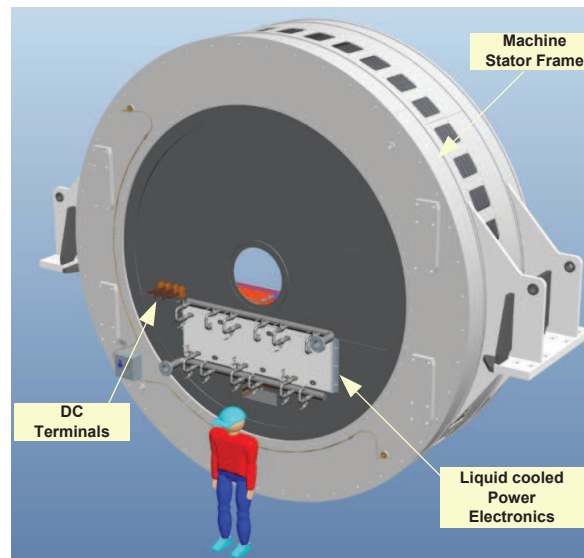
Machine Converter Integration Concept With Liquid Cooled Power Electronics.
